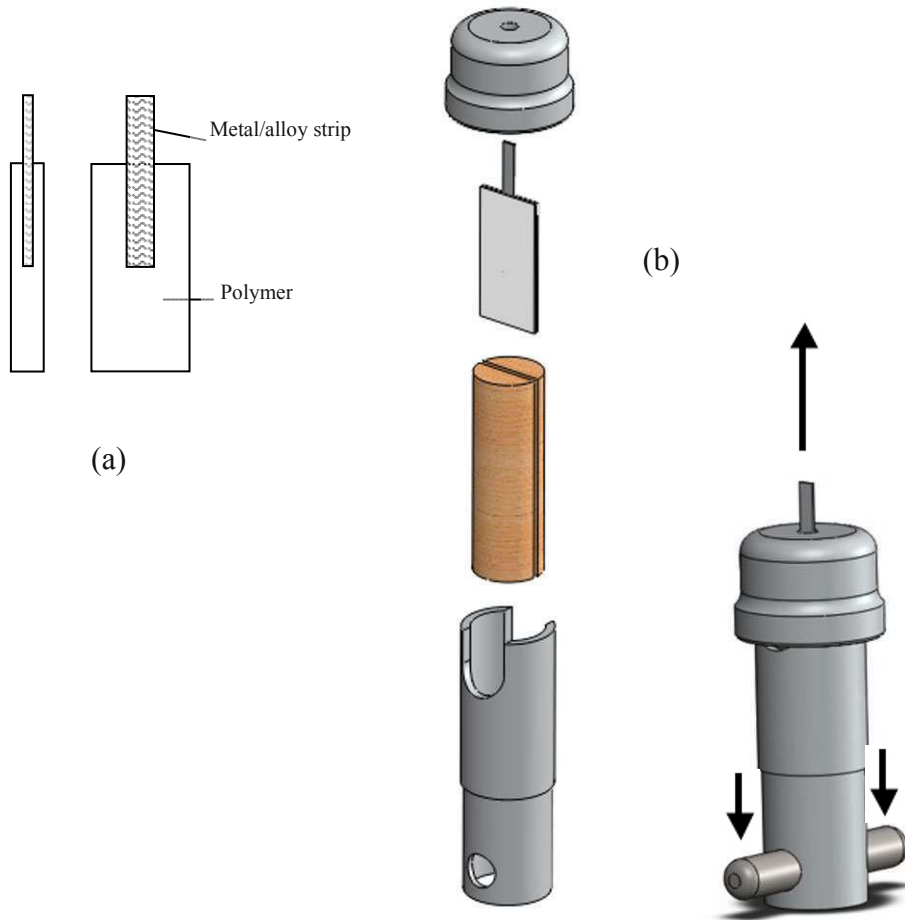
(a) Sketch of a pullout sample, lateral and frontal view. (b) Sketch of the sample holder for the pullout test, exploded and compressed view with applied load.
